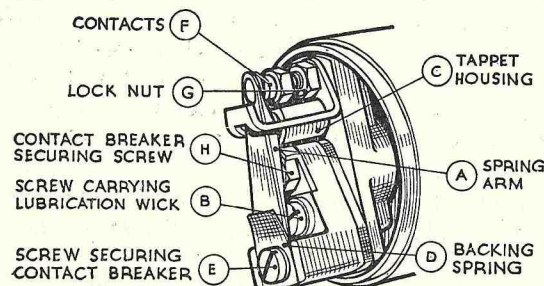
THE FACE-CAM TYPE OF CONTACT-BREAKER.
